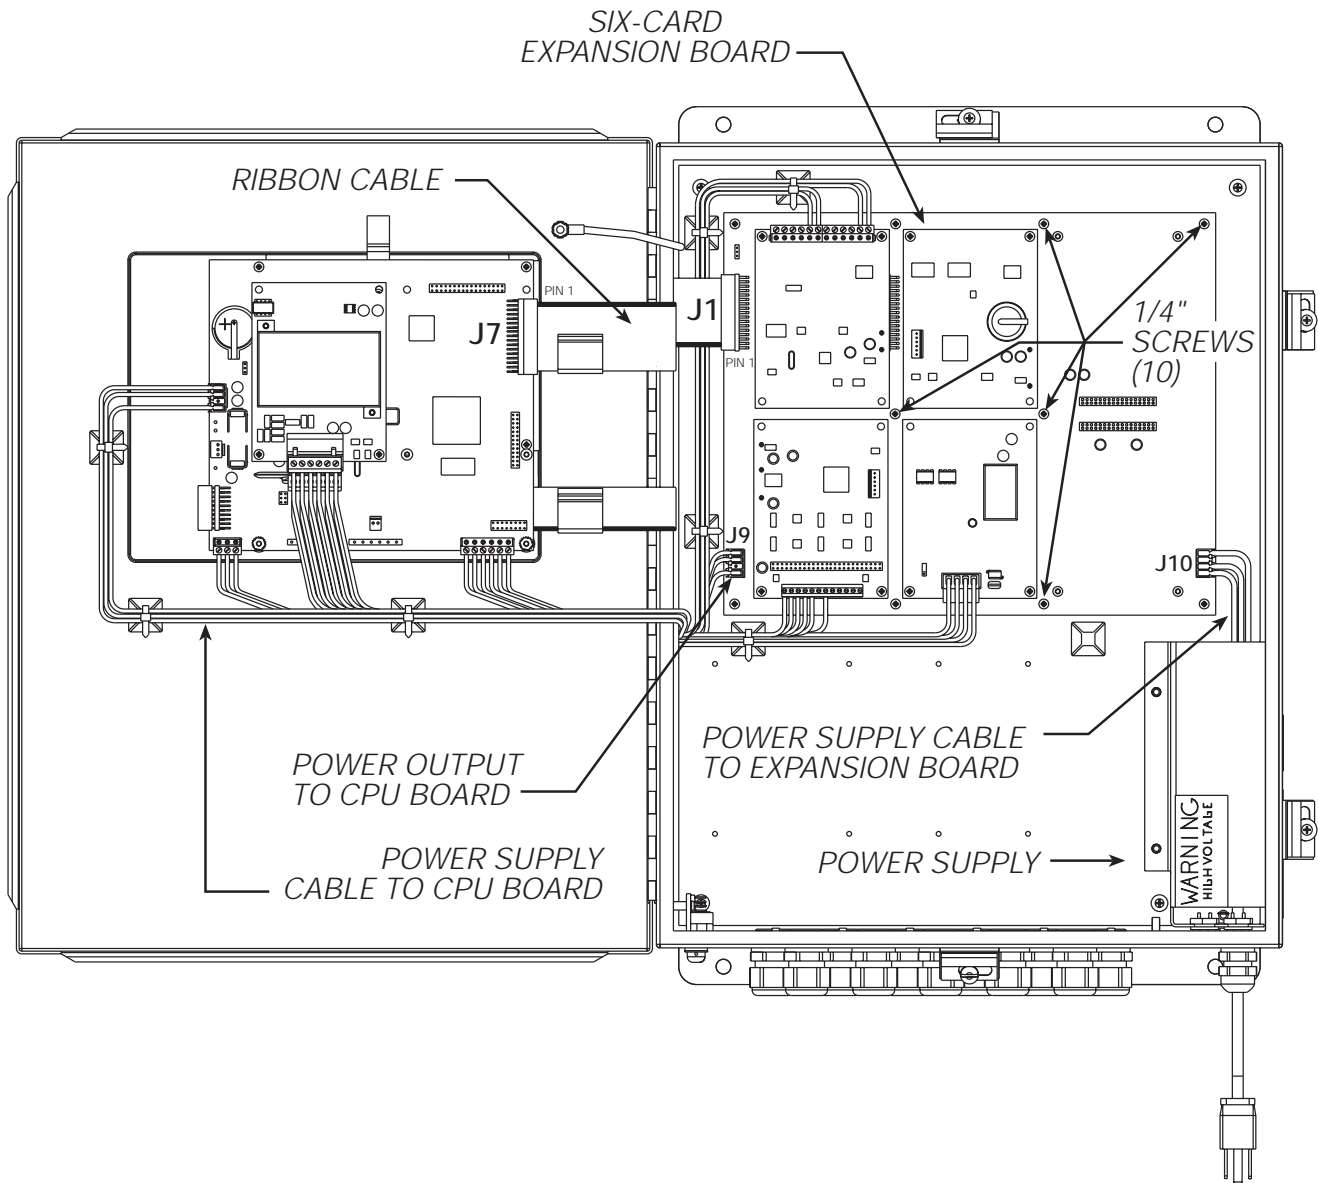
Six-Card Expansion Board Installed in Wall Mount Enclosure
